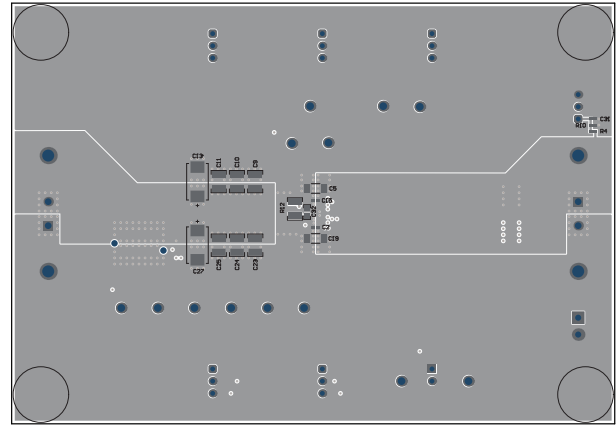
Bottom-Side Composite View (Viewed From Bottom)
